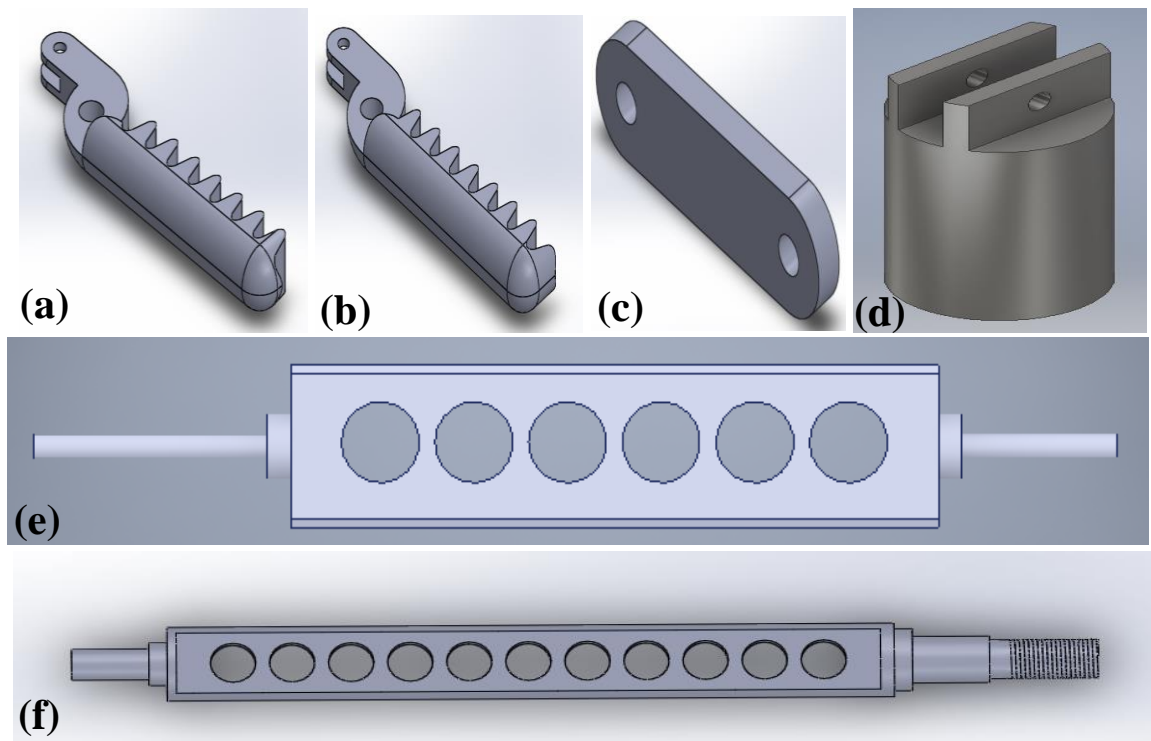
Illustrating different parts of the device; (a) Grasper Jaw A, (b) Grasper Jaw B, (c) Short Bar, (d) Lead Head carrying countersign threading, (e) Primary Magnetic Array
